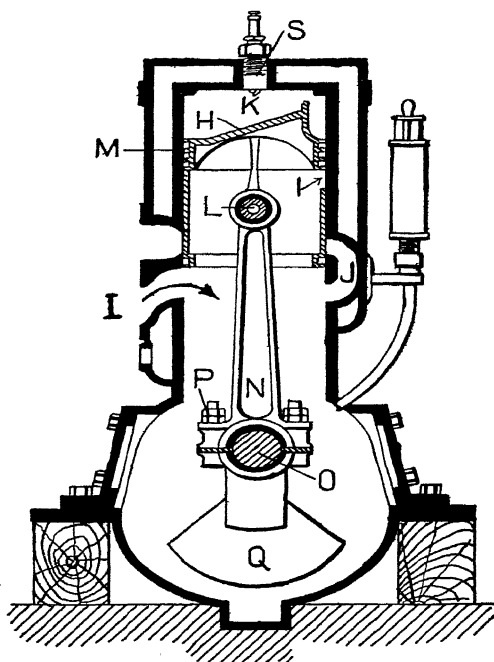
FAIRBANKS GASOLINE MARINE ENGINE.
